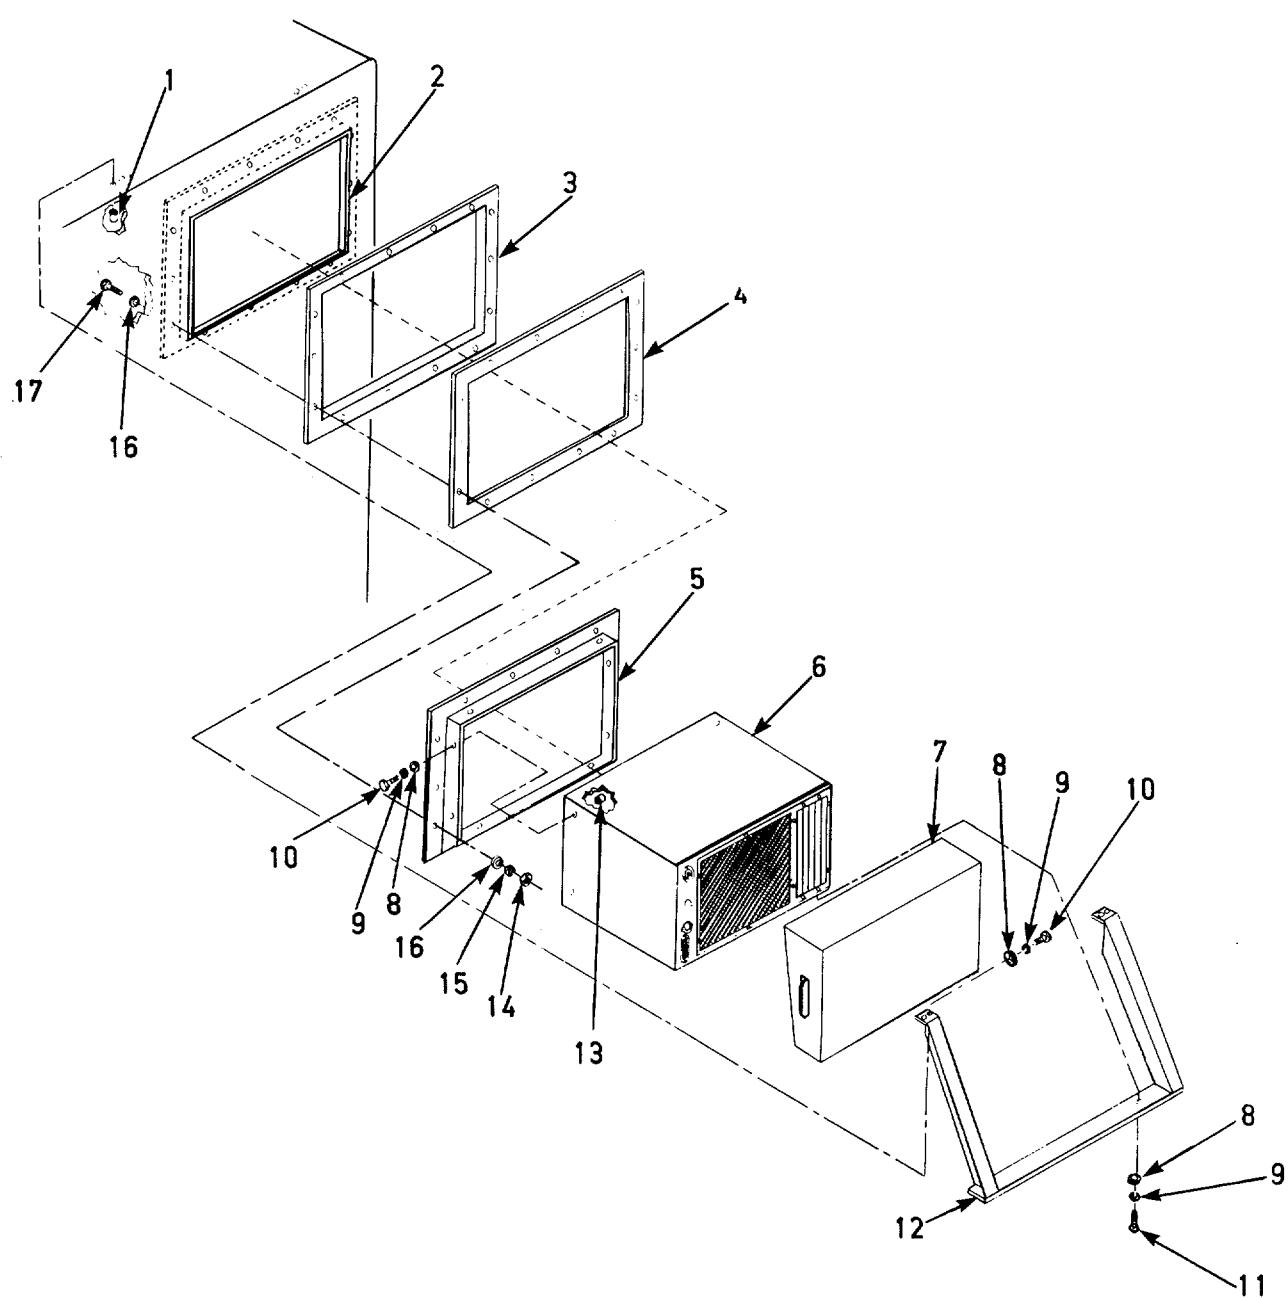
Air Conditioner, Cover, and Mounting Brackets
